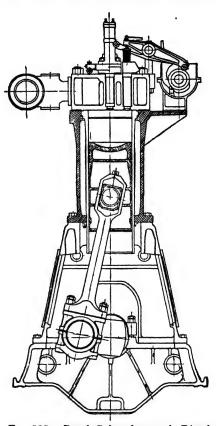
Busch-Sulzer four-cycle Diesel engine.
